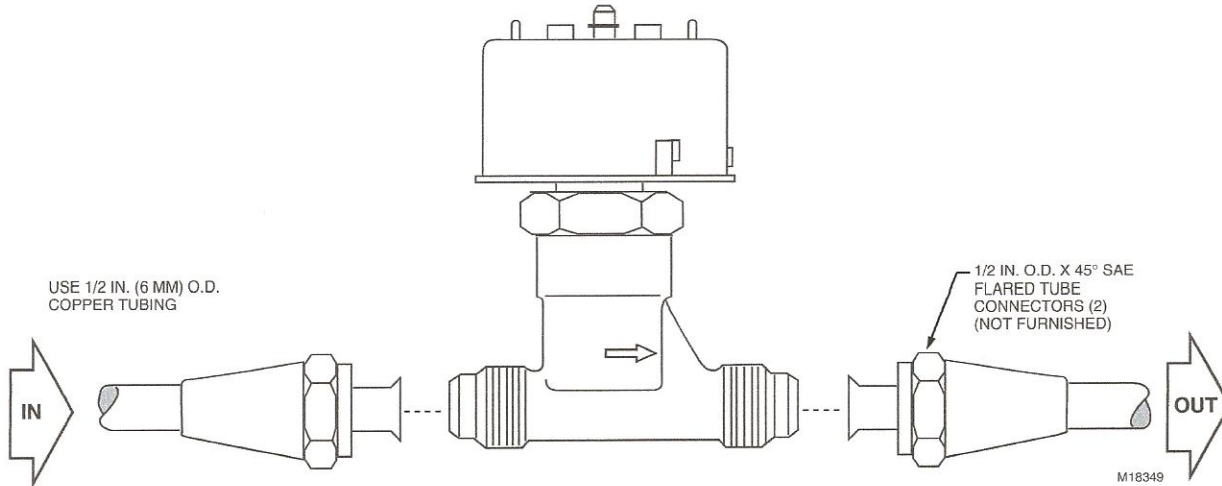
VP527A connectors and copper tubing dimensions in. (mm).
